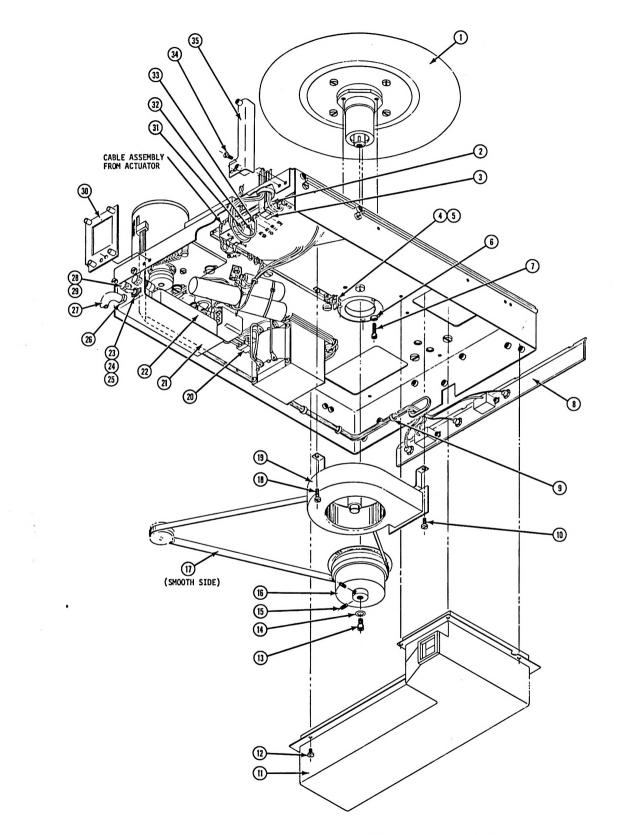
Chassis Assembly (73080), Bottom View Revised: July 15, 1976
